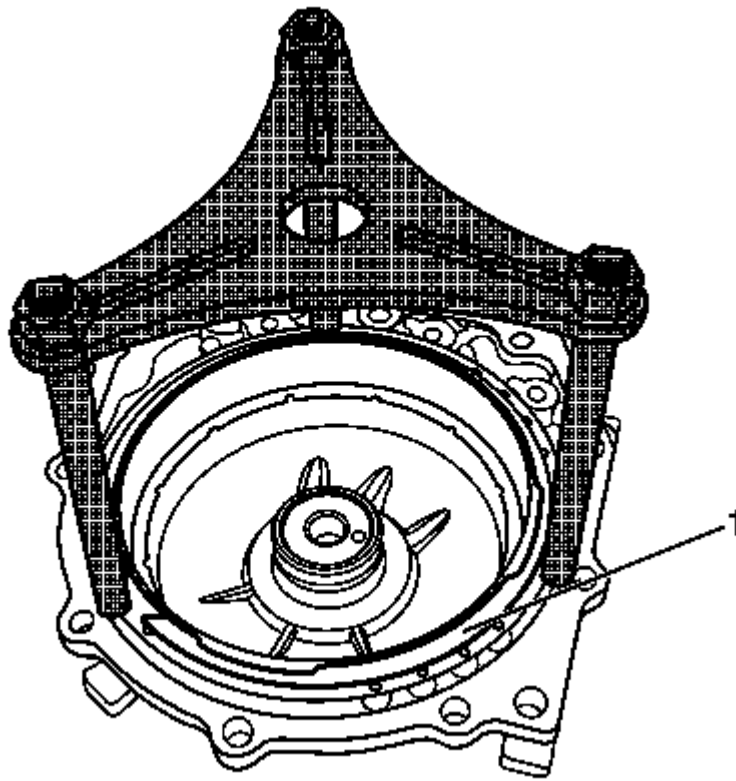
View Of DT-50899 Spring Compressor And A Press
